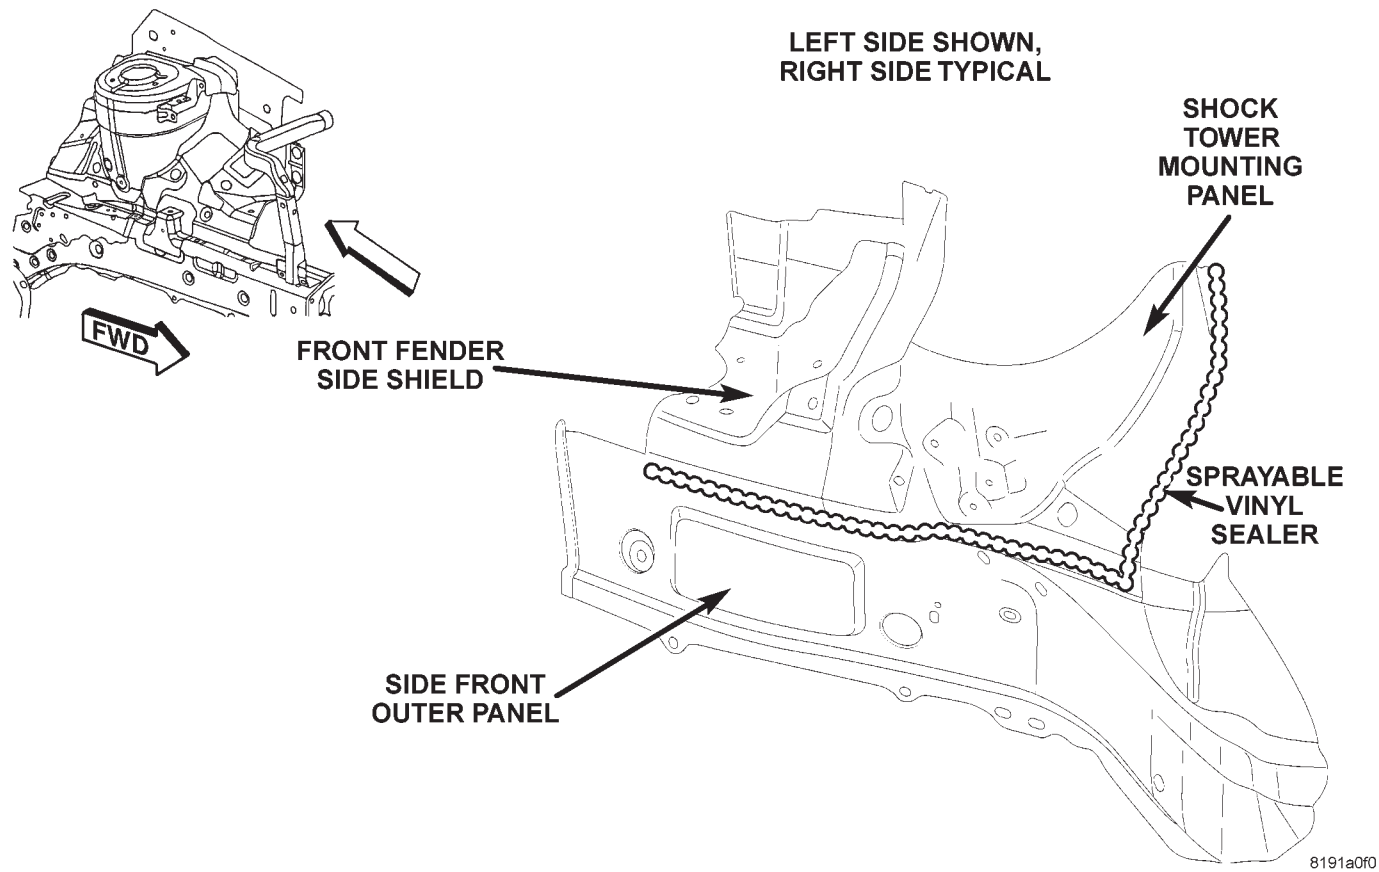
FRONT WHEELHOUSE/SHOCK TOWER
